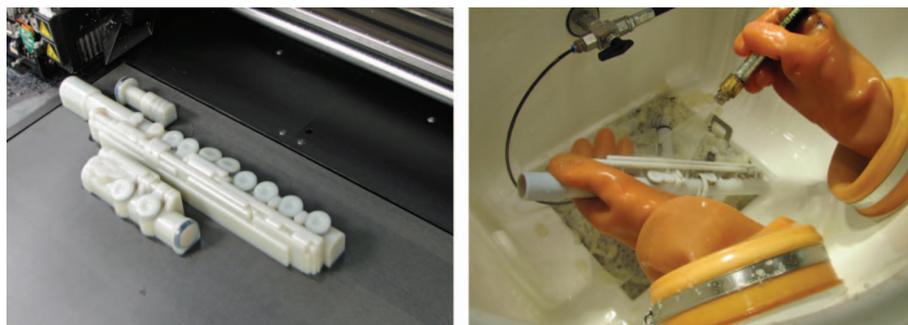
Printed flute parts by Objet Connex500, covered with support material (left), and the cleaning process (right).
